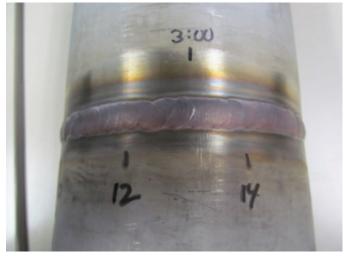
The 5-in. schedule 40 butt joint produced in Type 304 stainless steel pipe in the 1G-R (as-welded) condition
